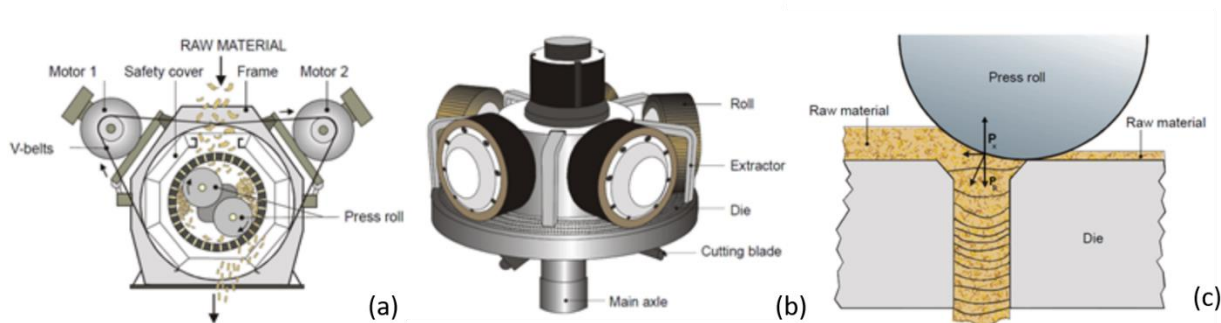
Pellet mill design with (a) ring die and (b) flat die, (c) Assembly of a pellet in the press channel of a pellet mill. Copyright BioResources, 7(3), pp.4451-4490.
